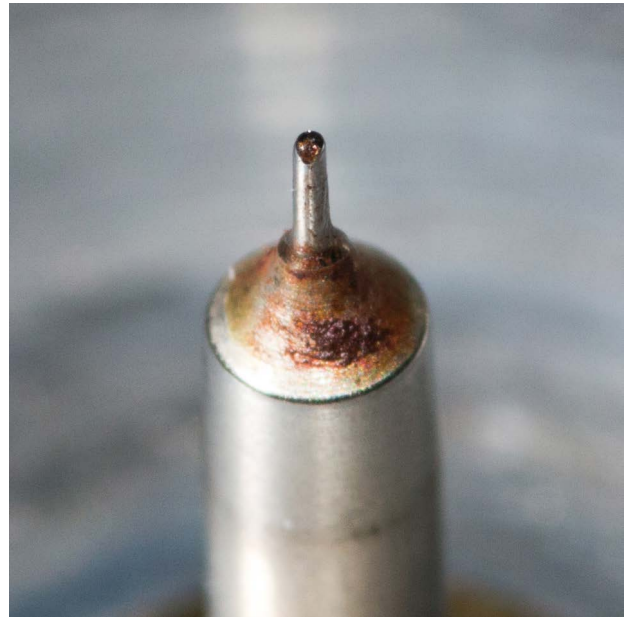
This is a photo of a severely damaged needle. This one is ruined and can not be used because it will not stay positively centered in the bushing.
